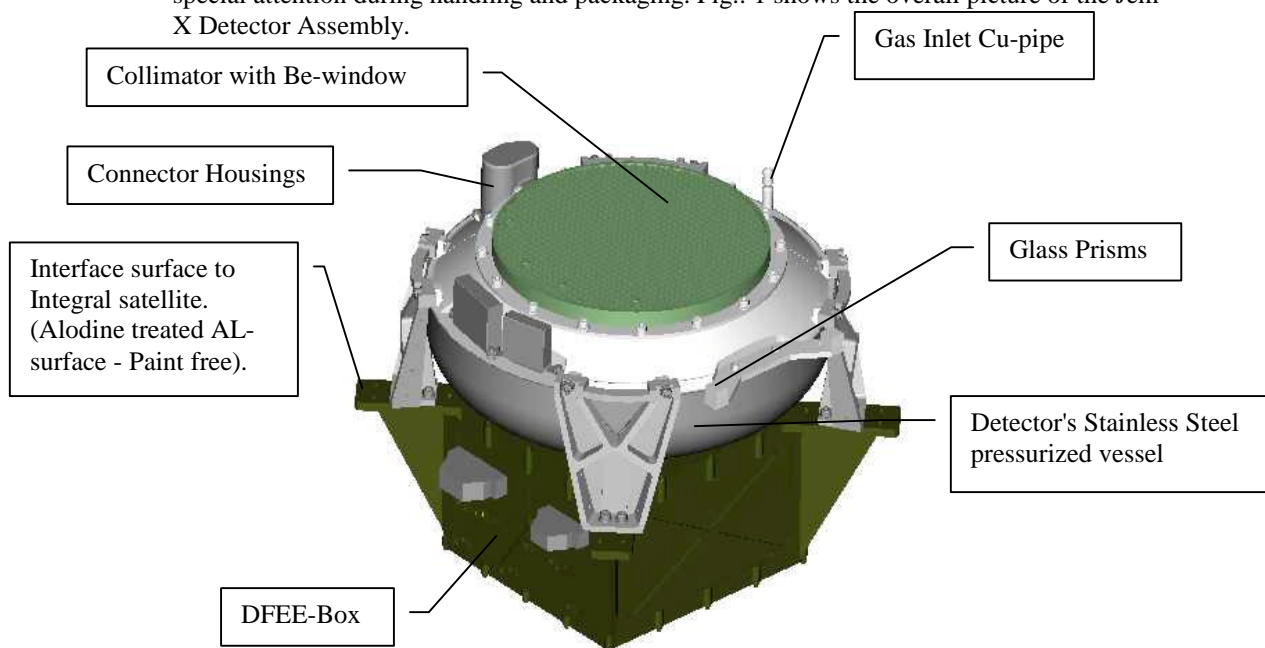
3D view of the Jem-X-Detector Assembly.
